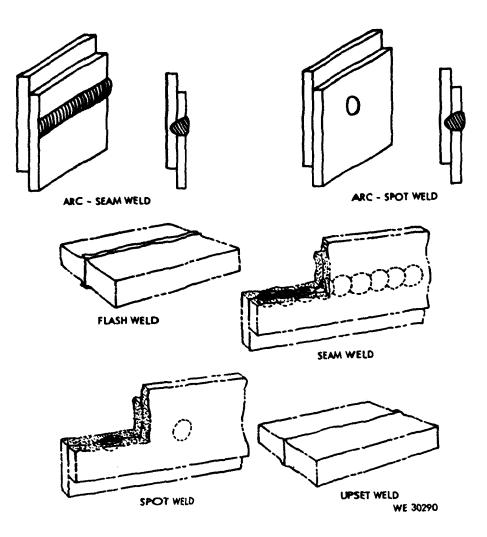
Flash, seam, spot, and upset welds.
